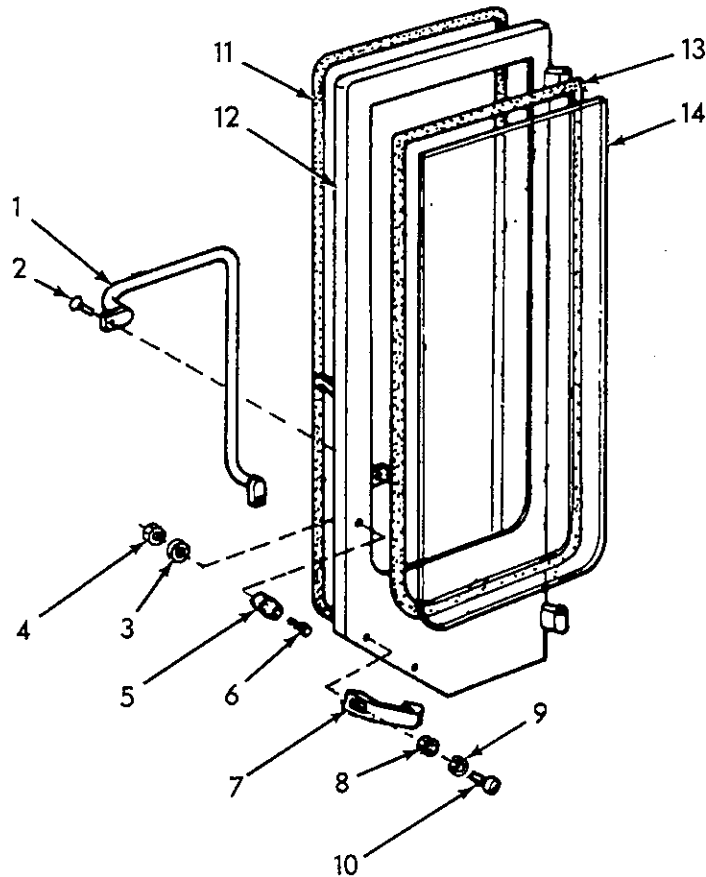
LEFT SIDE DOOR ASSEMBLY
